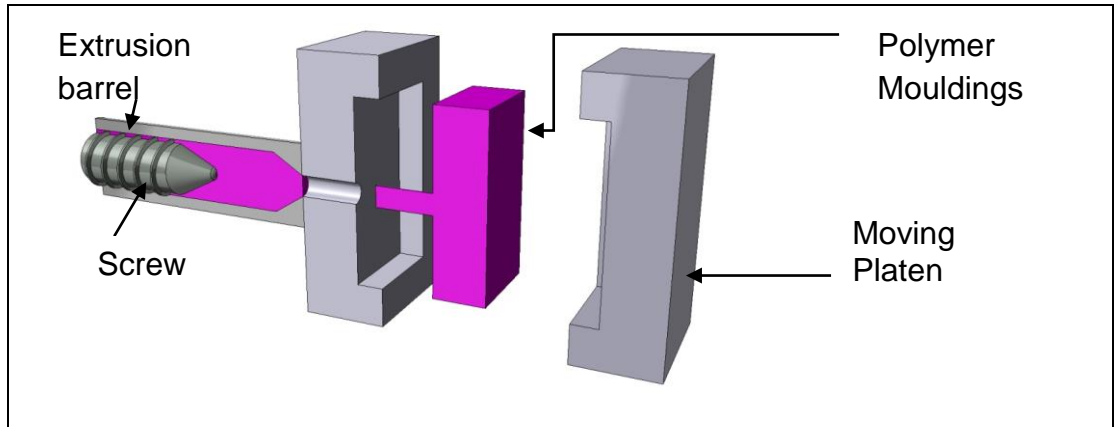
Final step: Opening and ejection of the moulded part (adapted from Rutland plastics)
